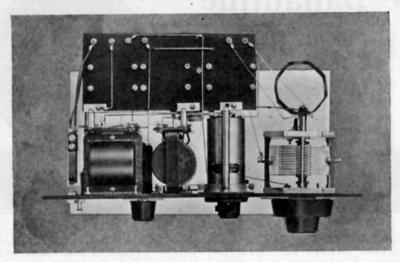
You can see from this view the method employed for mounting the tube panel and the concealed wiring
